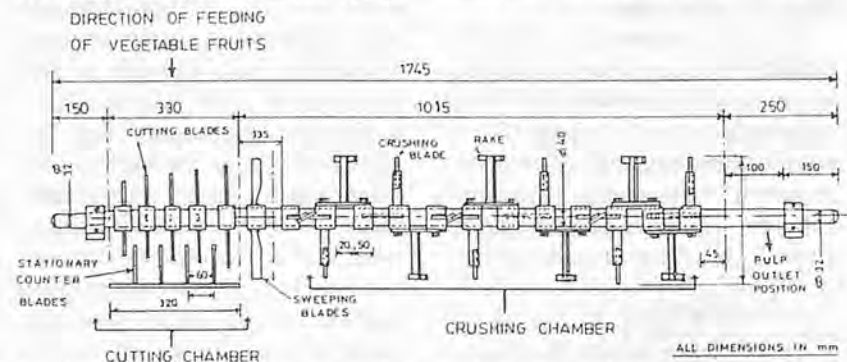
Mounting arrangement for blades and rakes on rotor shaft.
